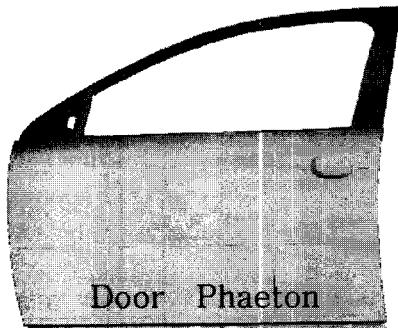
Laser hybrid welded door of the Phaeton of VW
